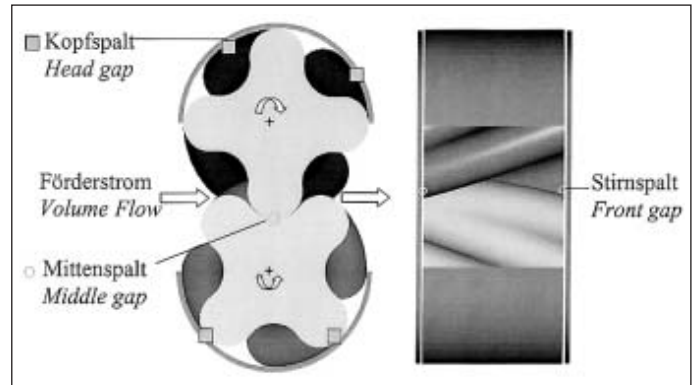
Gaps in a rotary lobe pump with helical toothed lobes
